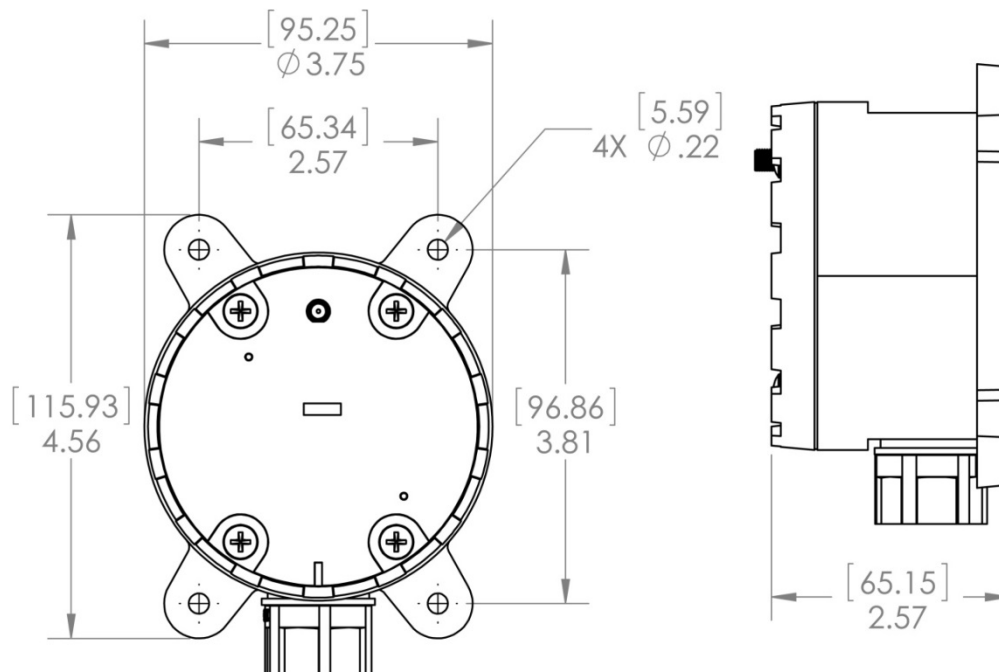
Mechanical Drawing - Wzzard Industrial Models | Units = [millimeters] inches
